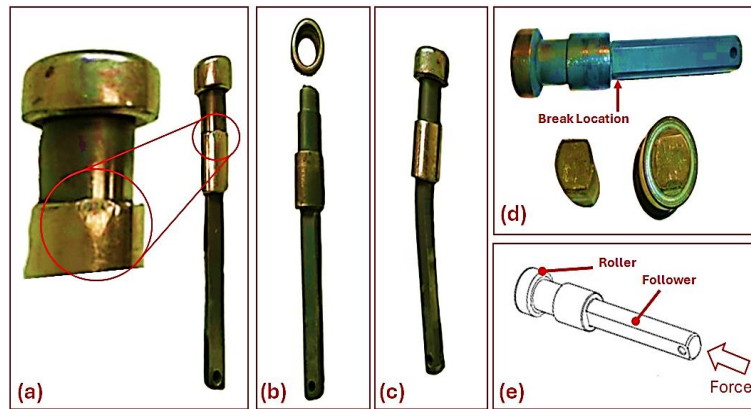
Types of failure: (a) dented body, (b) dislodged roller, (c) bent, and (d), broken followers; and (e) the force direction acted on the follower assembly.
